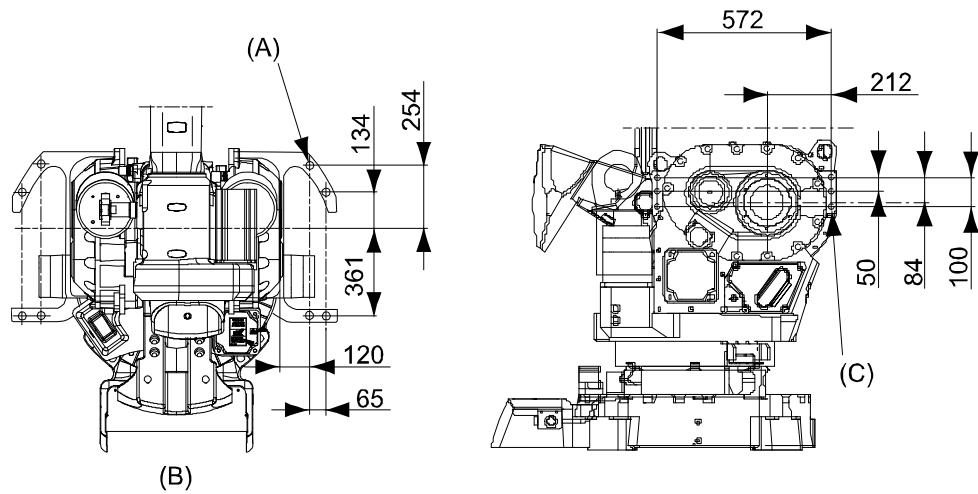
Holes for mounting of equipment on to the robot base (dimensions in mm).
